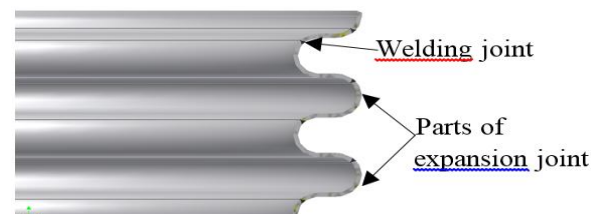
Method of manufacture U-shape expansion joint and that welding processes.
